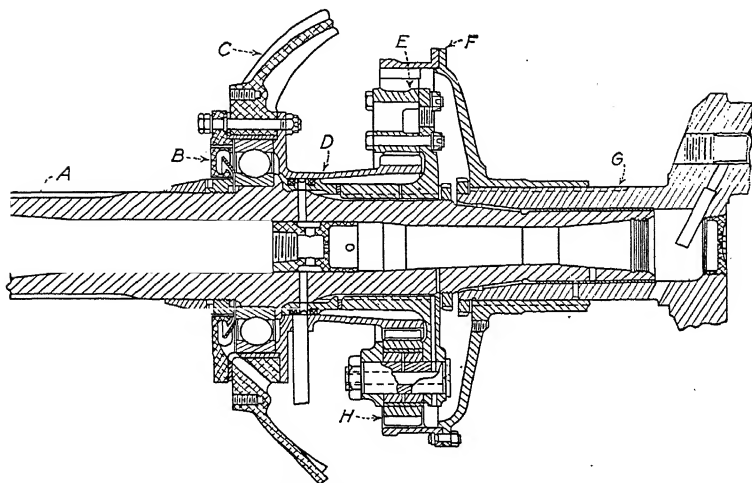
Arrangement of the Pratt and Whitney type planetary reduction gear.
